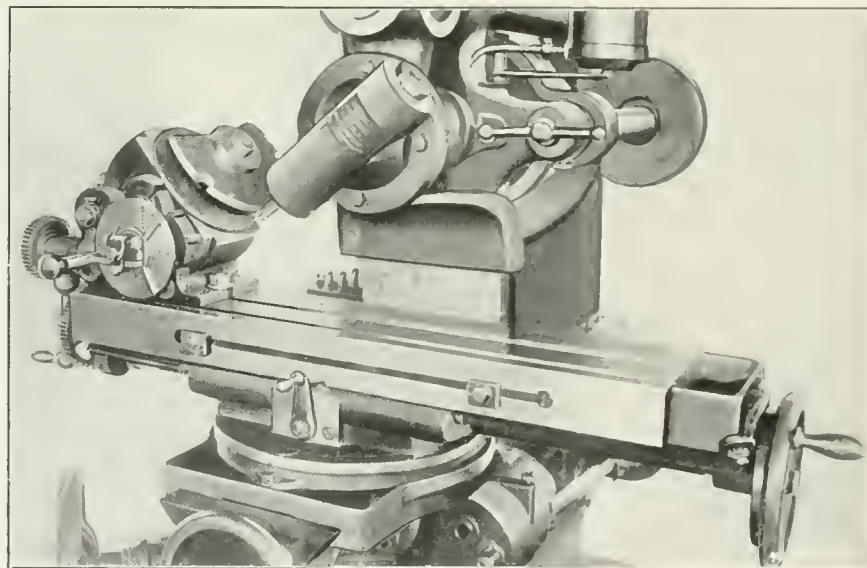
Method of Milling Constant-rise Cams on the Milling Machine
